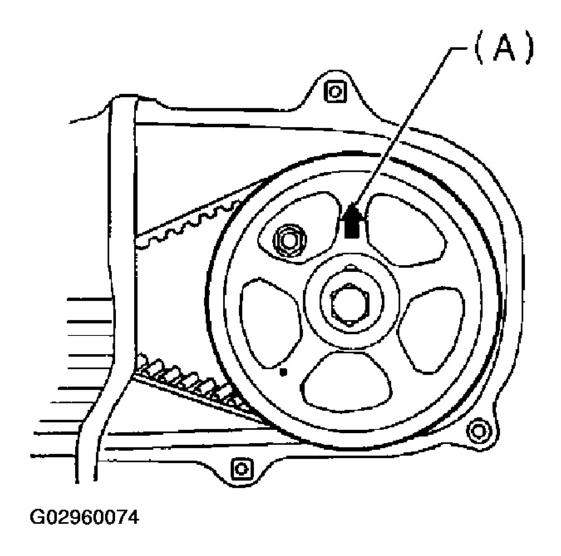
Identifying Arrow Mark On Camshaft Sprocket (LH) Courtesy of SUBARU OF AMERICA, INC.
